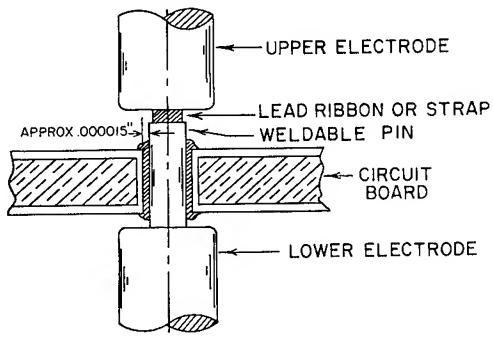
Welding configuration used with "Fusicon" pins.
